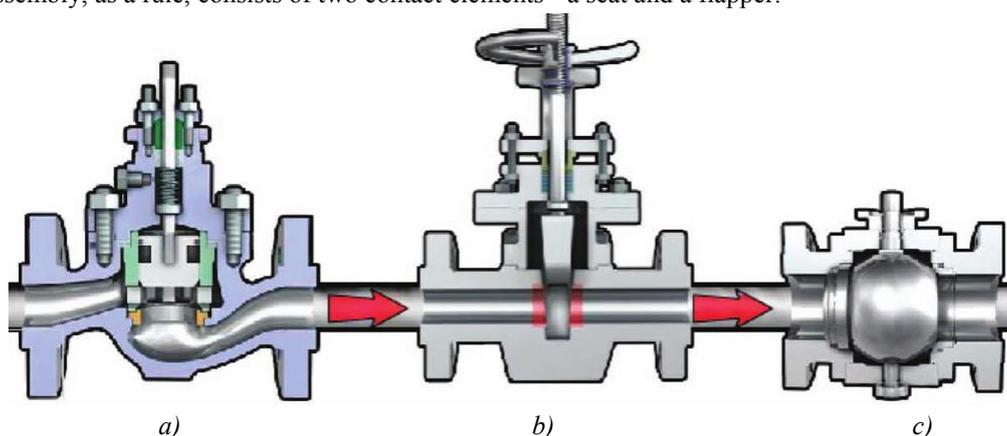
Design features of stop valves of pipeline equipment: a) throttle; b) flapper; c) ball valve [2]
